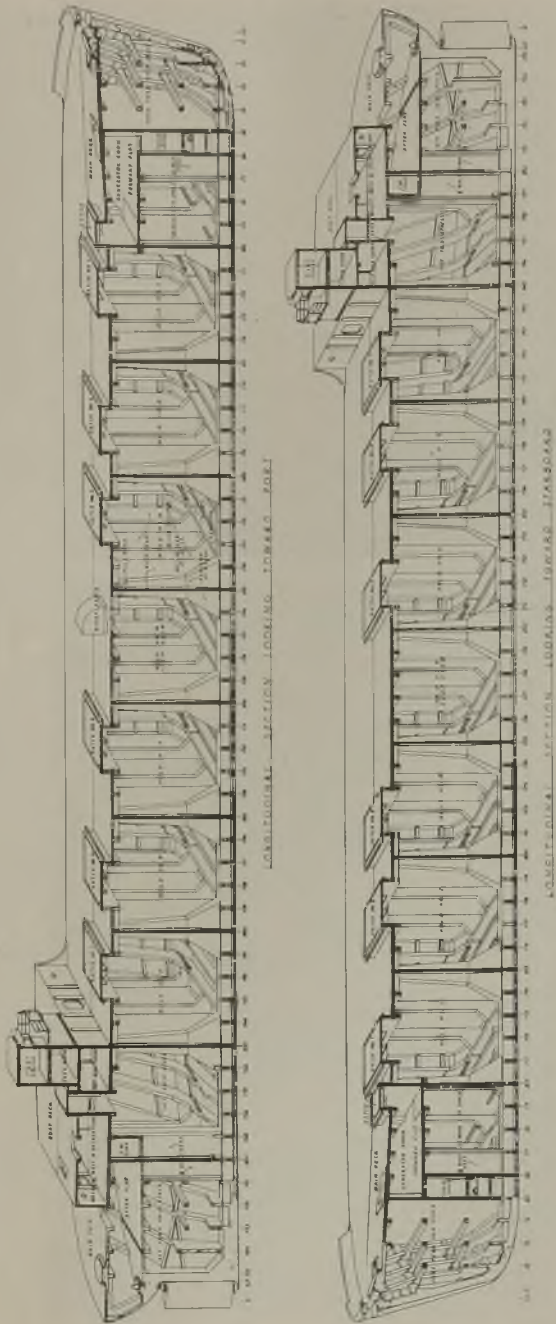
Isometric longitudinal sections of B7-D1 dry cargo hulls built at San Francisco.
